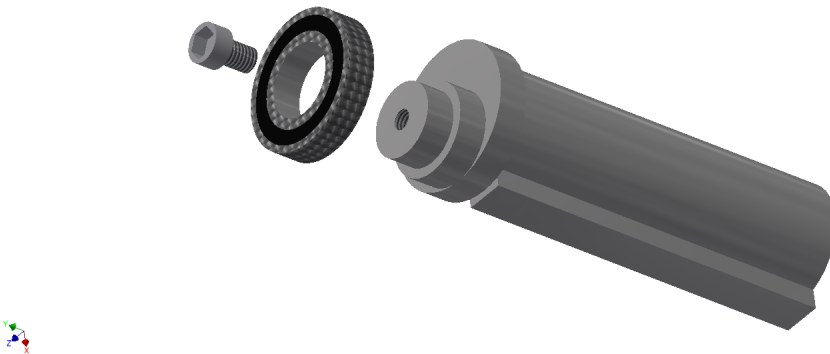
Illustration of shaft with bearing and fastening bolt.
